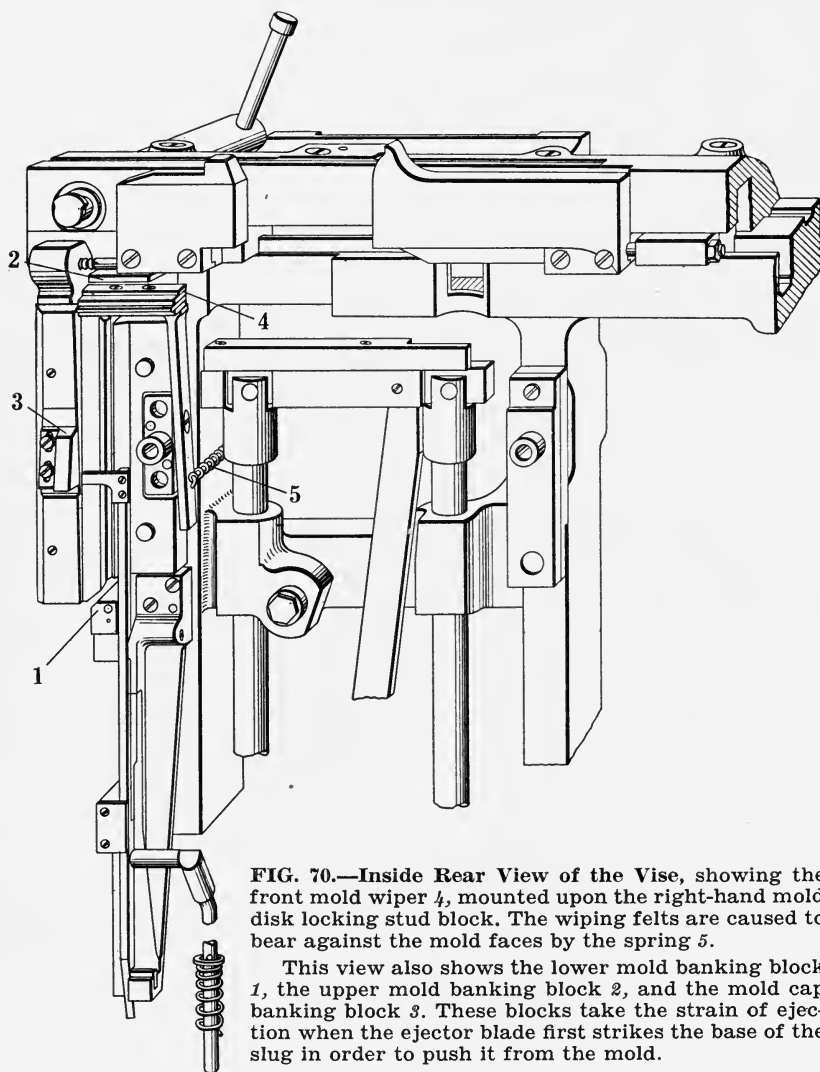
Inside Rear View of the Vise, showing the front mold wiper 4, mounted upon the right-hand mold disk locking stud block. The wiping felts are caused to bear against the mold faces by the spring 5.
